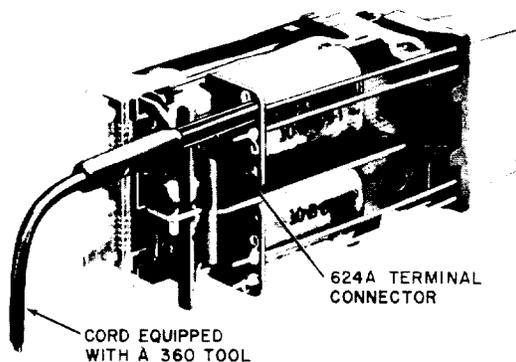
Connecting to Winding Terminal of the AK- or AM-Type Relays (Wire Spring)
